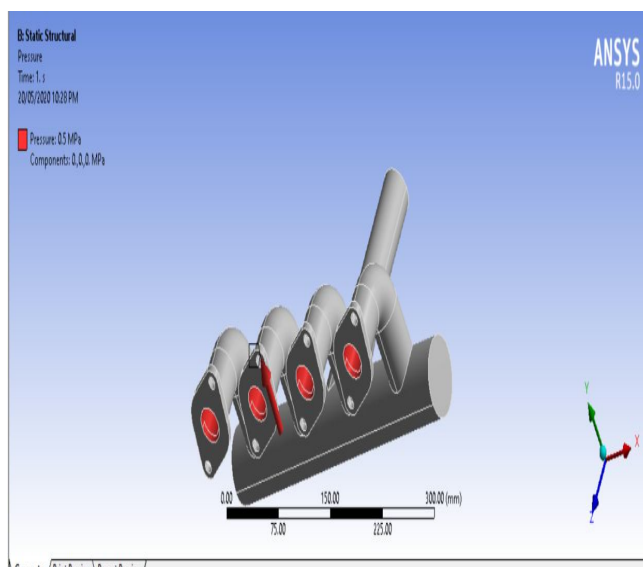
Exhaust gas pressure of 0.5 Mpa is applied at the internal surface of the exhaust manifold
